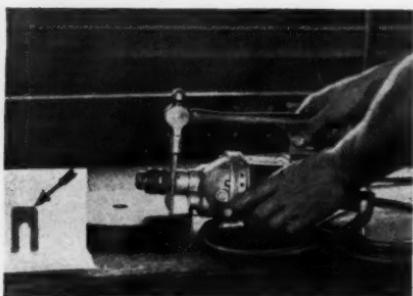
Tapered-shank chucks should be removed from the spindles by using wedges similar to that indicated by the arrow, inserting the wedge between the chuck and a shoulder on the spindle, as this operator is doing.
